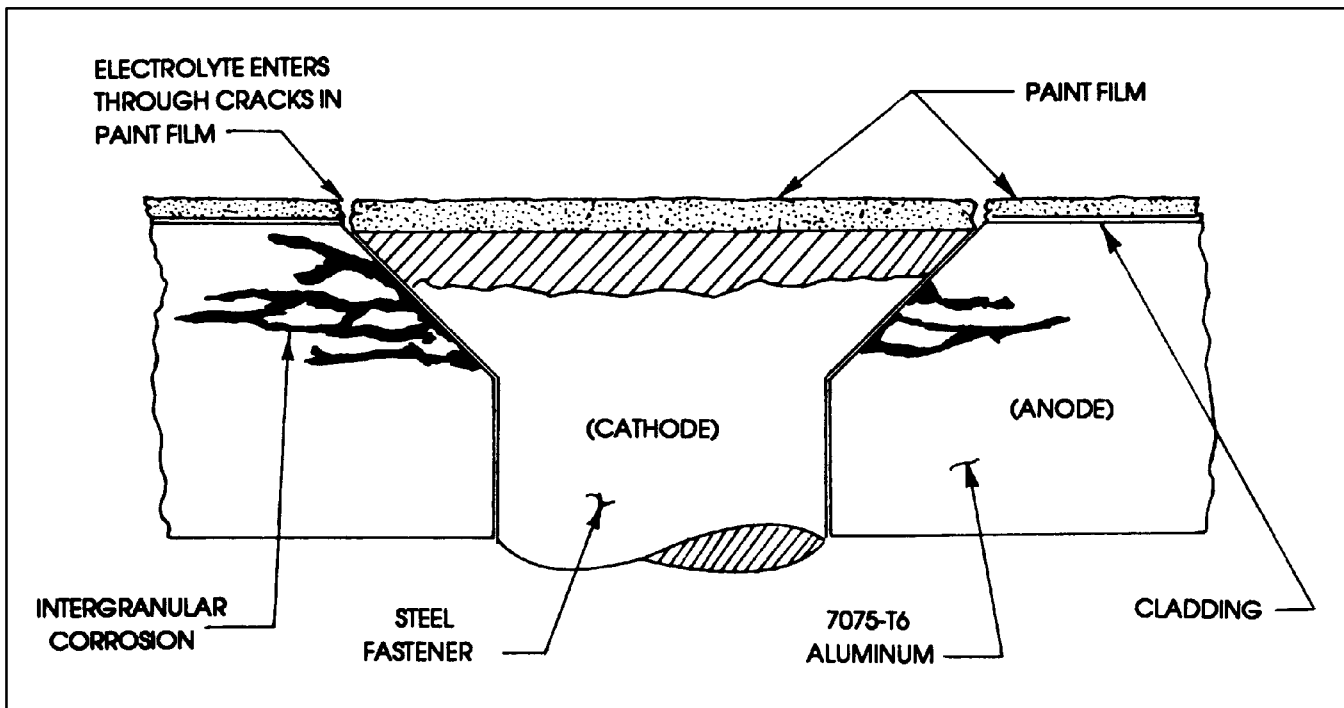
Intergranular Corrosion of 7075-T6 Aluminum Adjacent to Steel Fastener
